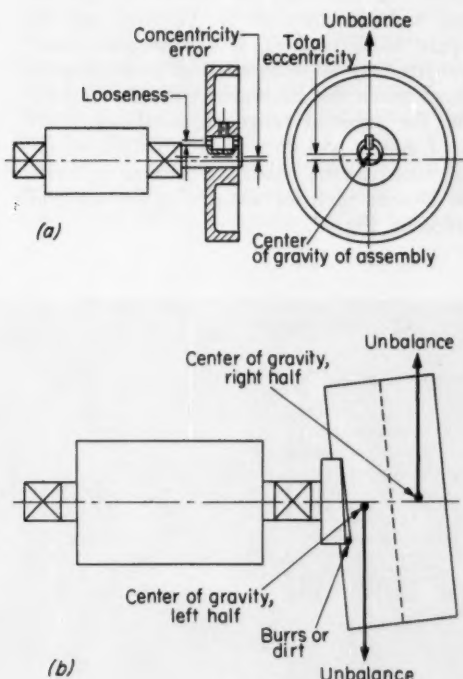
Assembly errors that can cause unbalance. At *a*, looseness between pulley and shaft causes pulley to be displaced when set screw is tightened. At *b*, squareness errors, burrs, and dirt at the mating surfaces of assembled parts cause angular displacement of the axis of the mounted part, producing an unbalanced couple on the assembly.
